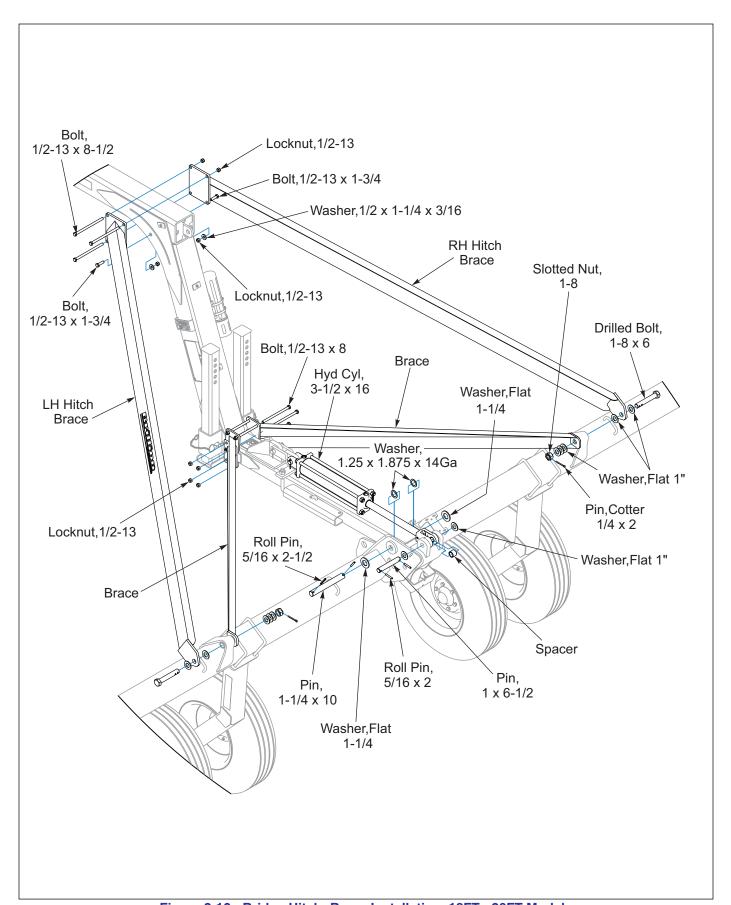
Bridge Hitch: Brace Installation, 18FT - 20FT Models
